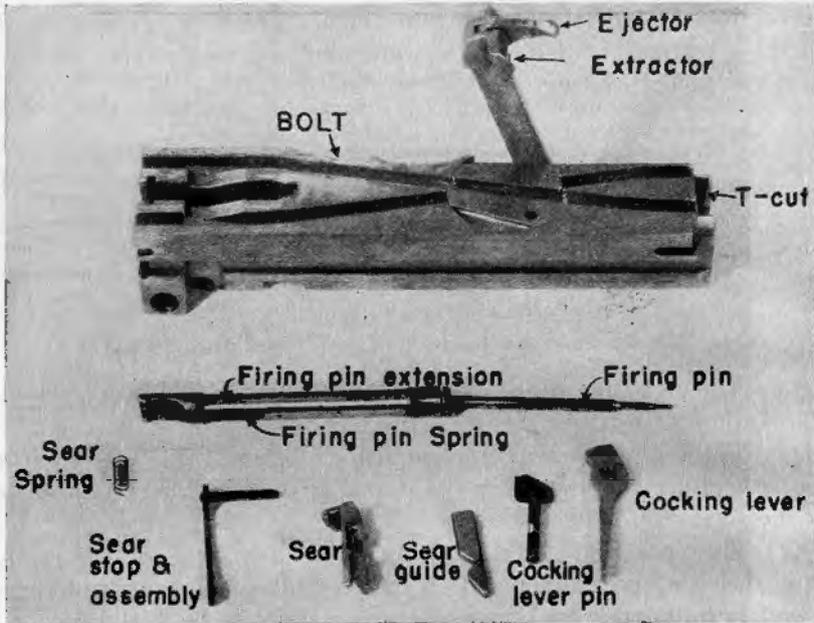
Bolt group, caliber .50 machine gun, M2.
